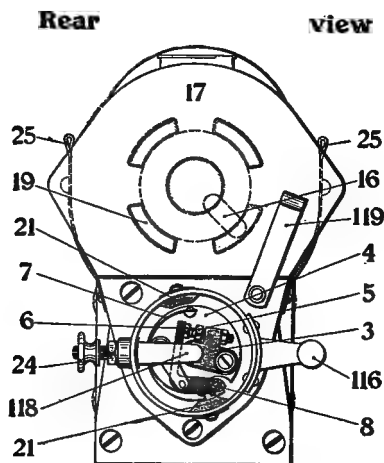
Rear View of Bosch Magneto, Showing Contact Breaker and Distributor.
